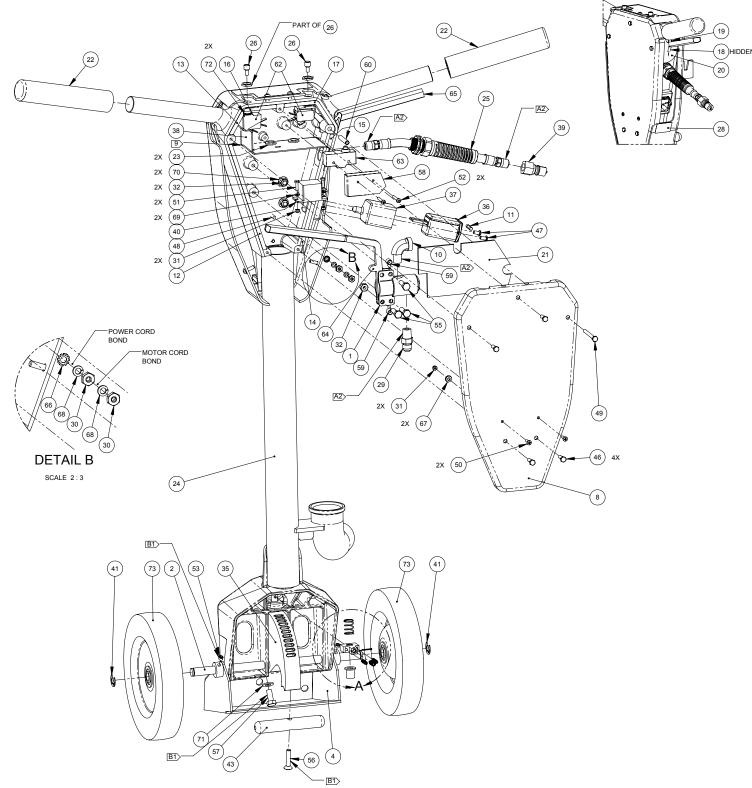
Upper and Lower Handle 230V/50Hz CE Assembly - View 3 of 3 604-051-214 Rev. A
